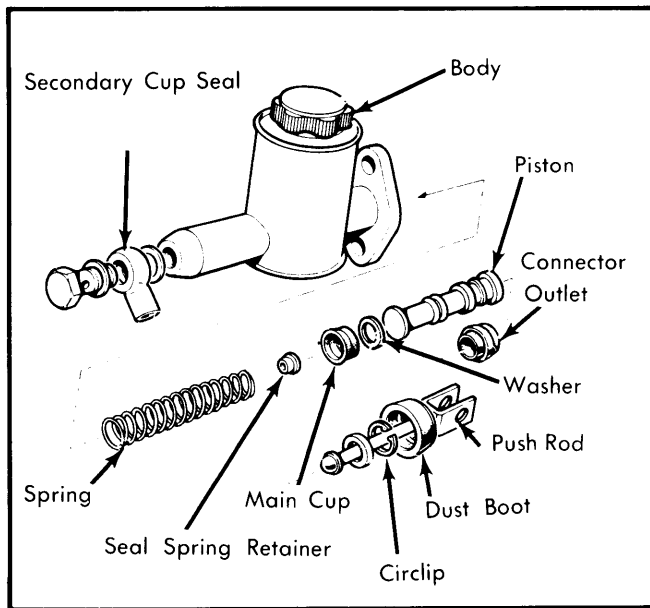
Exploded View of MGB Clutch Master Cylinder
